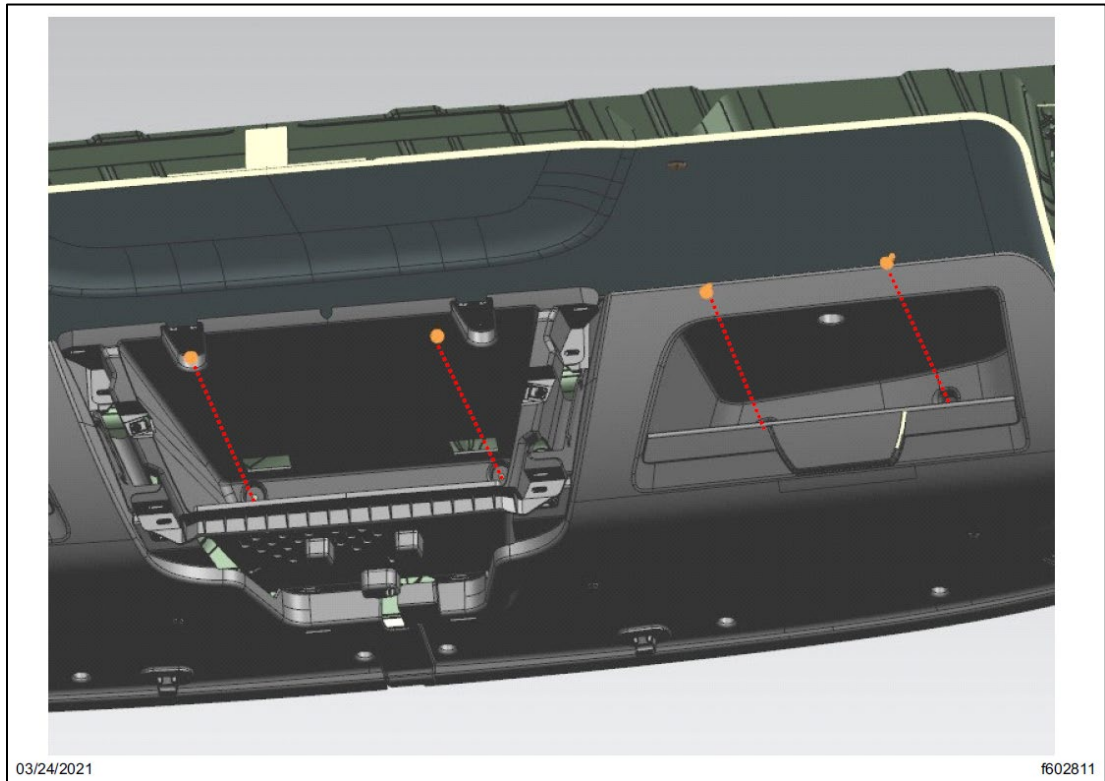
, Fasteners Attaching the Center Storage Bin and the RH Side Overhead Storage Assembly to the Cab Roof
